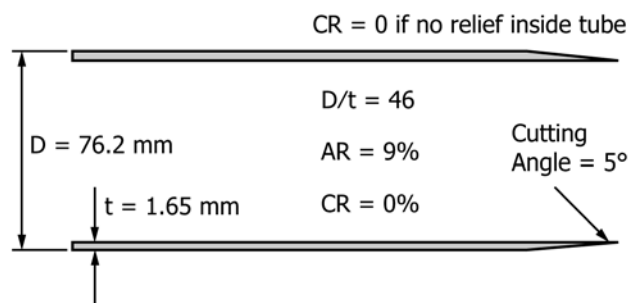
Schematic of Standard 3-in. [75-mm] Thin-Walled Tube Modified by Removing the Beveled Cutting Edge and Machining a Five-Degree Cutting Angle (DeGroot and Landon (6)).
